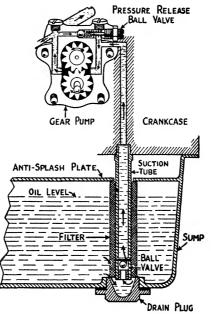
DIAGRAMMATIC VIEW OF STANDARD OIL PUMP WITH FILTER
